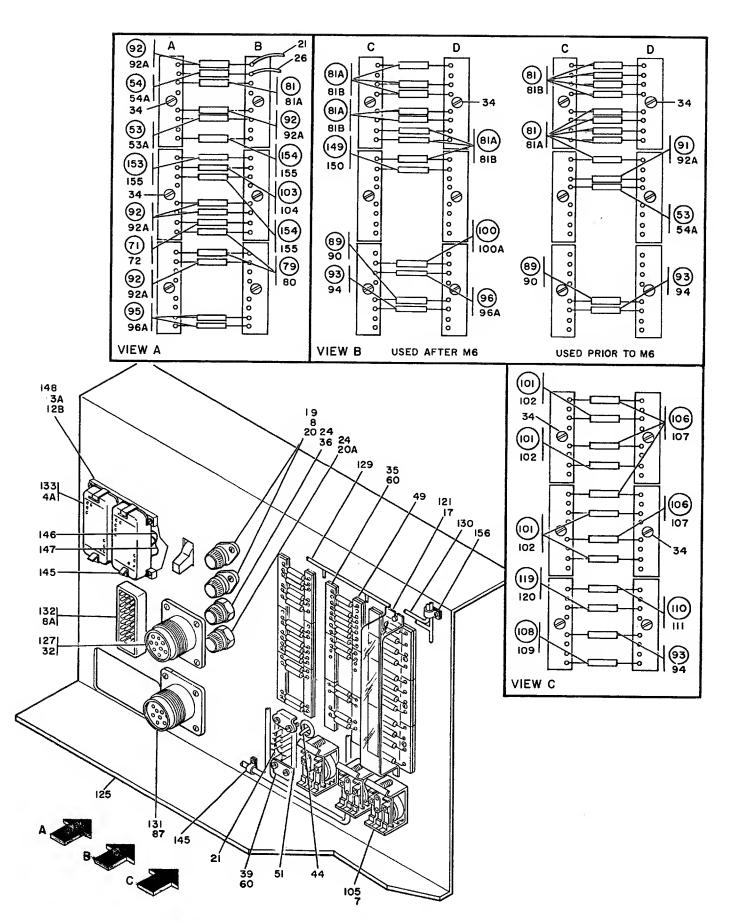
SEQUENCE PANEL ASSEMBLY. SHEET 2 OF 2. SEE LIST 16.
